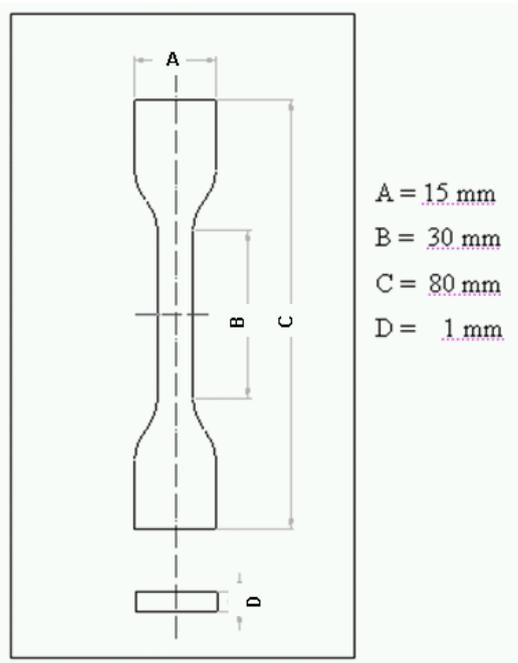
Dimensions of tensile test samples in accordance with ASTM D 0638.
